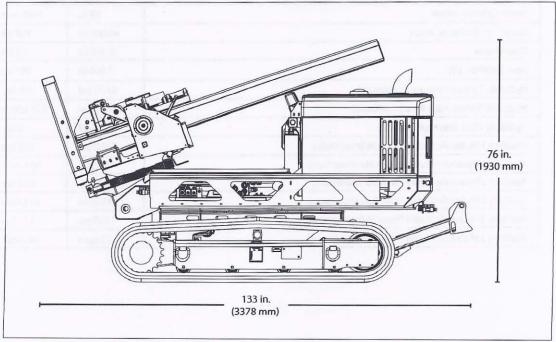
Geoprobe® Model 7822DT -- Probe derrick folded for transport, side view.
